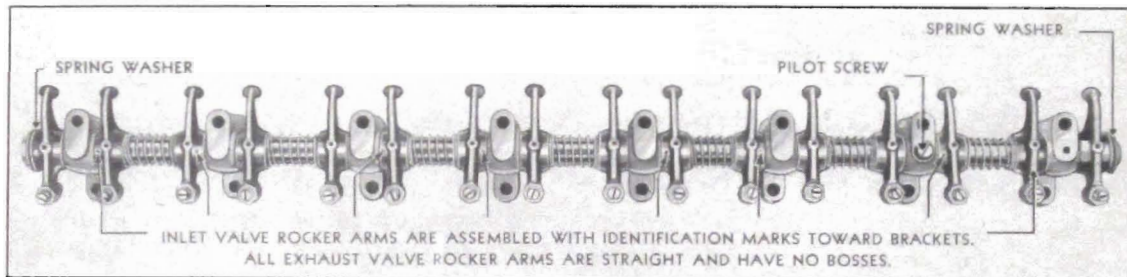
Rocker Arm Shaft Assembly—Series 60-70-90
